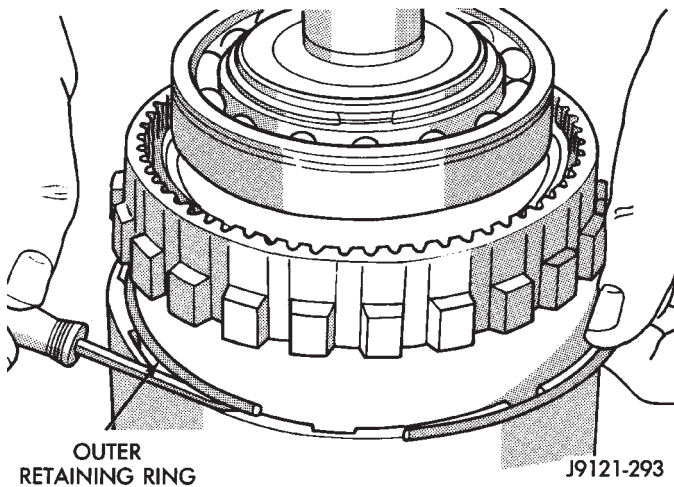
Clutch Drum Outer Retaining Ring Removal
